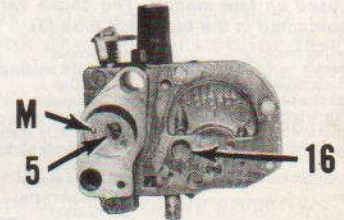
Punch mark (M) on throttle plate should be down as shown. Fuel screen is shown at (16).
